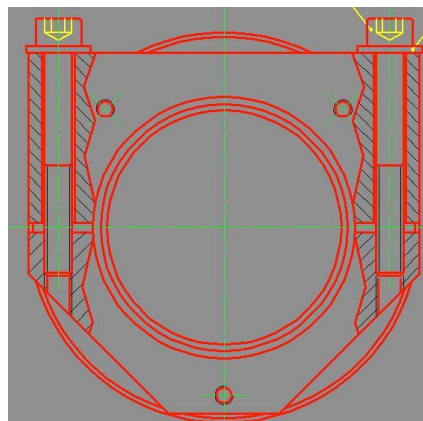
Design for base of RF fingers.²⁰ While the three screws mechanically work fine, it is possible that the contact surface between the two pieces is not consistent.
